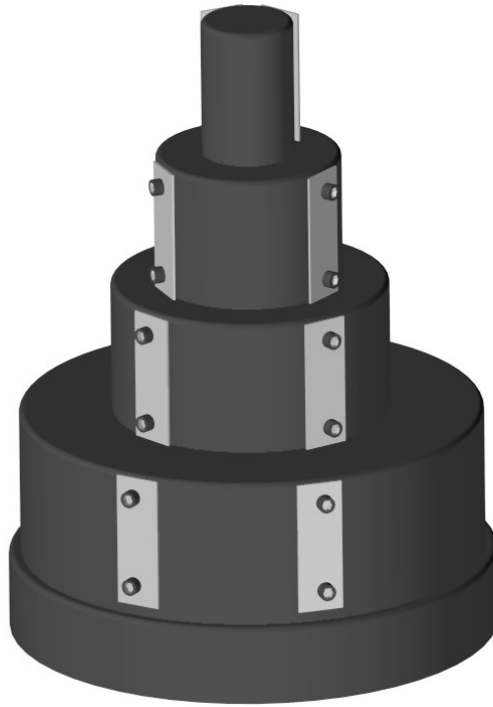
Computer aided drawing of fixture used to impose external tensile stress.
